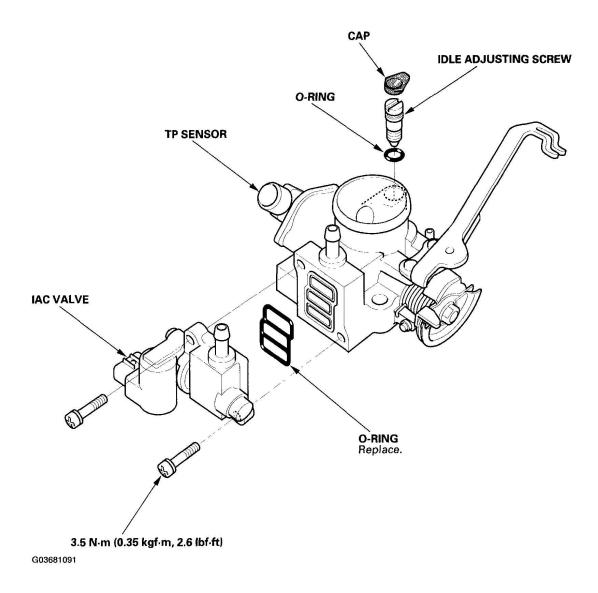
Identifying Throttle Body Disassembly/Reassembly Courtesy of AMERICAN HONDA MOTOR CO., INC.
